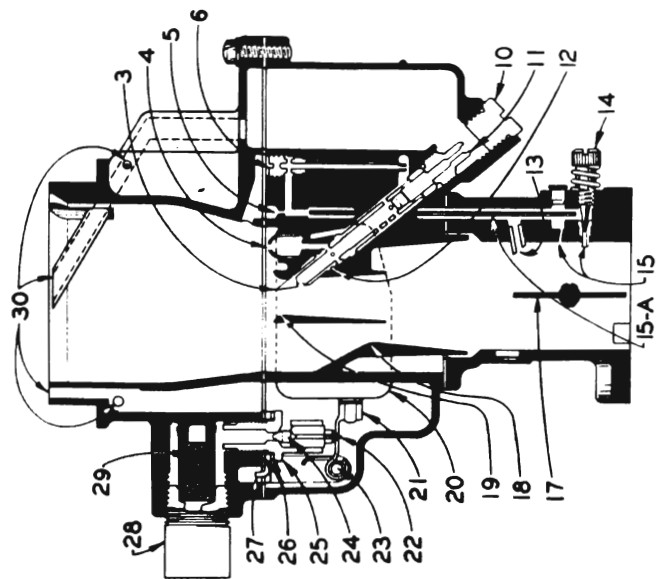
Rear Carburetor—All Series—Compound Carburetion Equipment
